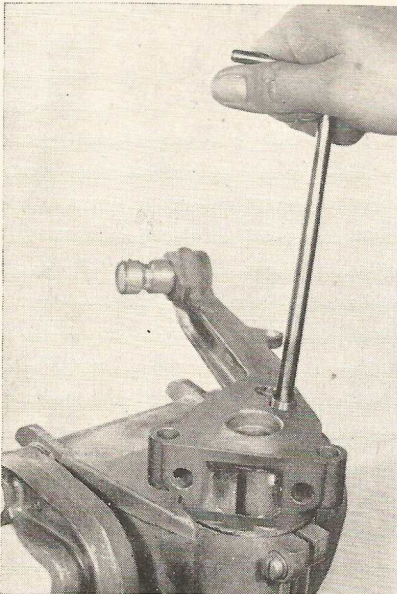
Illustrating use of tool No. S-260 for removing water tube from drive shaft casing.
